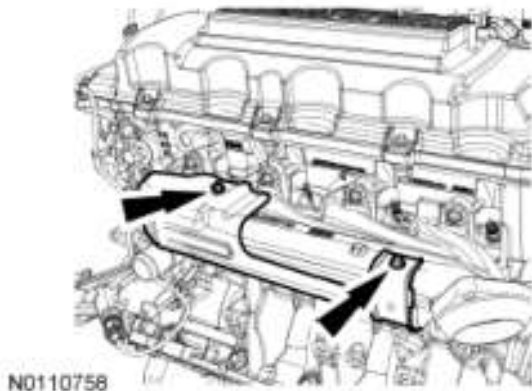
Locating Exhaust Manifold-To-Cylinder Head Studs
